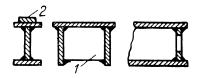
Sectional views of bed plates 1—stiffening rib; 2—supporting plate
